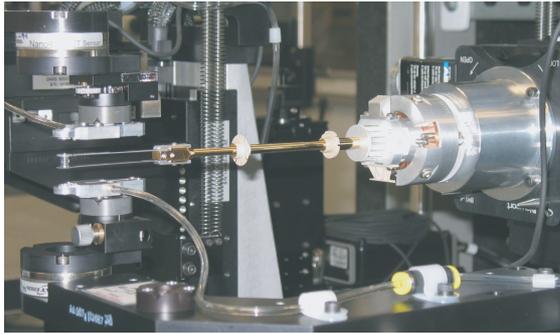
A prototype NIF ignition target that was assembled and mounted to its base using the Final Assembly Machine.
